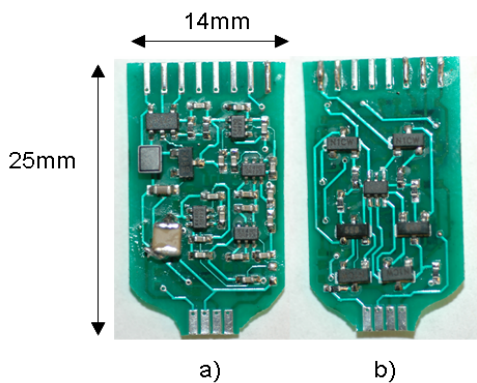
427 mg PC board with a) bias generation and b) drive realization
